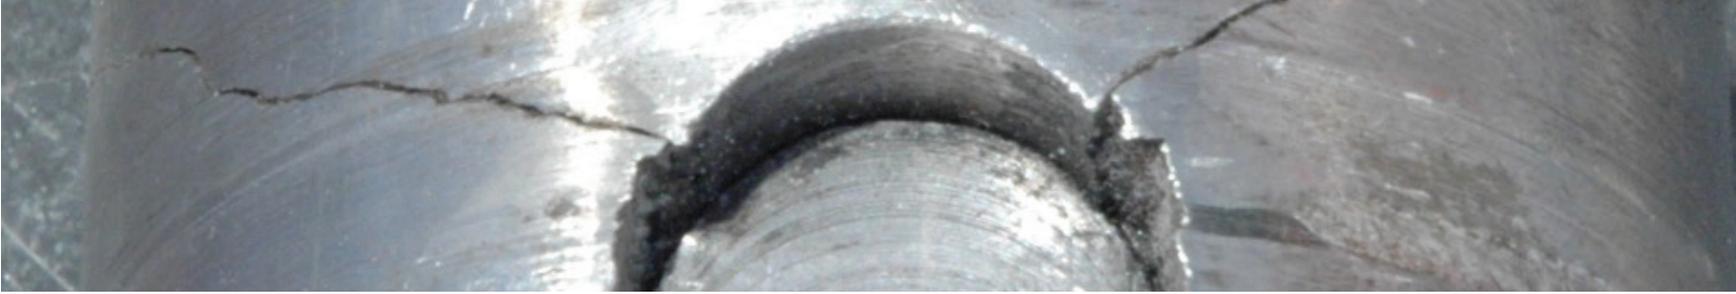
Reversed torsional fatigue, where two 45 degree cracks started at the keyway
